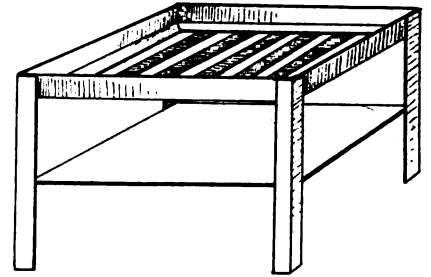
ANOTHER EASILY MADE STAND FOR THE WELDER
